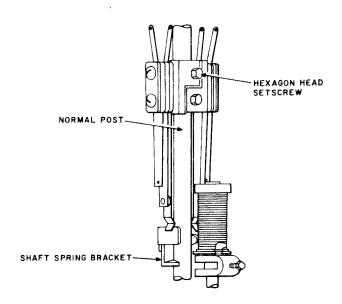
Normal Post Spring Assembly Operated by Shaft Spring Bracket
